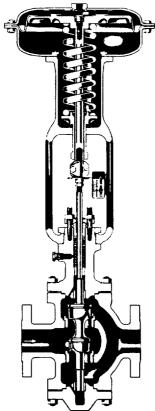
Type 657-A control valve with double port, top and bottom guided V-Pup valve plug.
